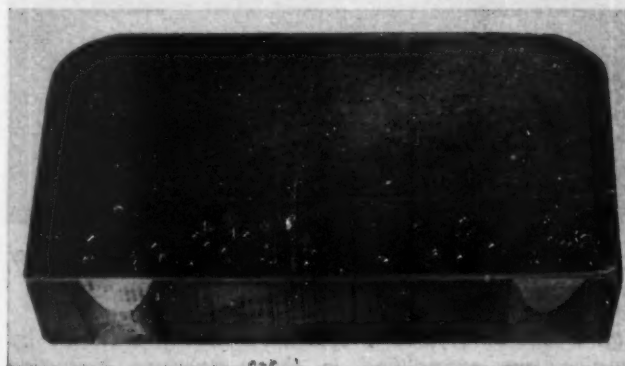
Modified pyramid projections milled into 3/4 by 2 by 4-inch steel block for a strapping tool
